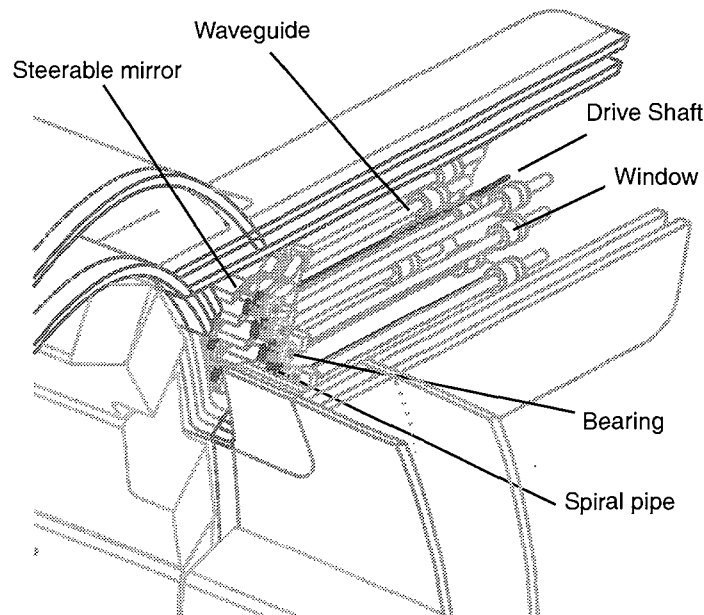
Upper Port EC launcher, with Radiation Shield Partially Removed to show the Inner Components
